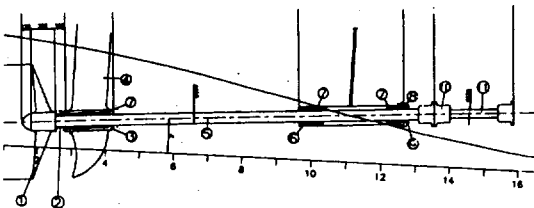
Shaft arrangement for G/T 220 ton passenger & car carrier ship
